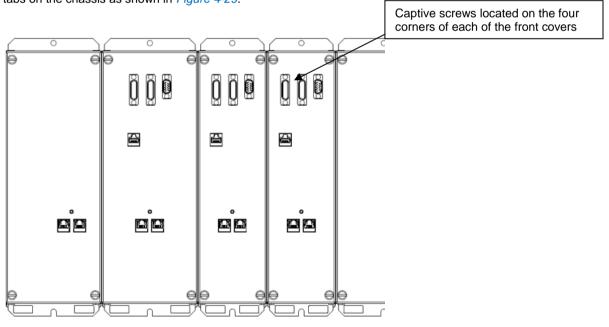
Fltted Front Covers on PIU, Drives and Capacitor Module
